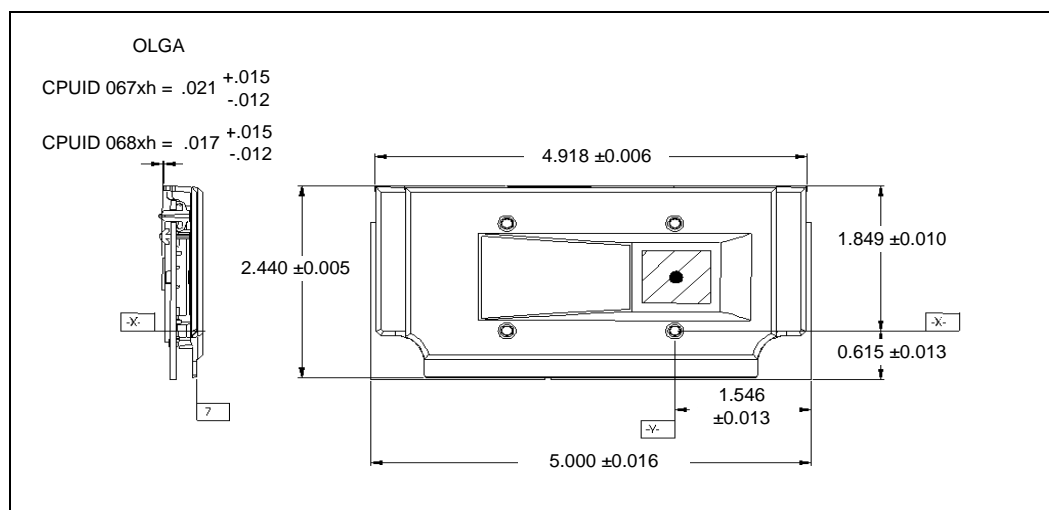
S.E.C.C.2 Packaged Processor Assembly — Heatsink Attach Boss Section
